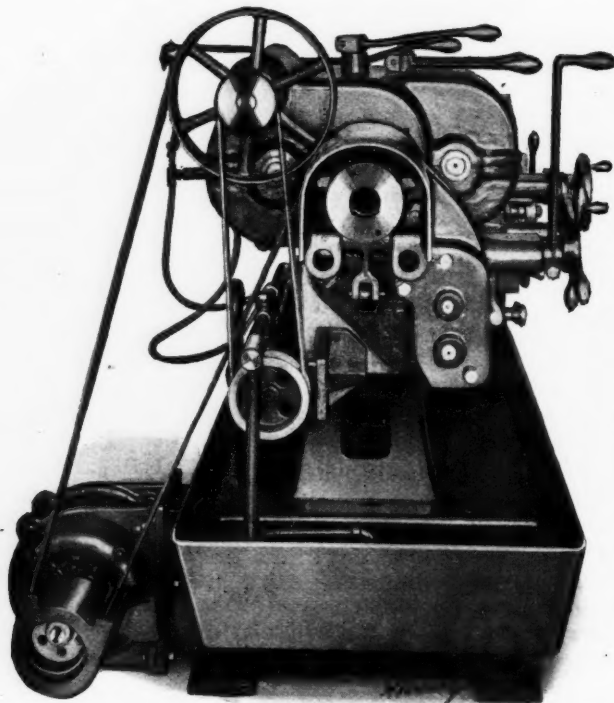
End View of Foster Universal Turret Lathe, showing Motor Drive
